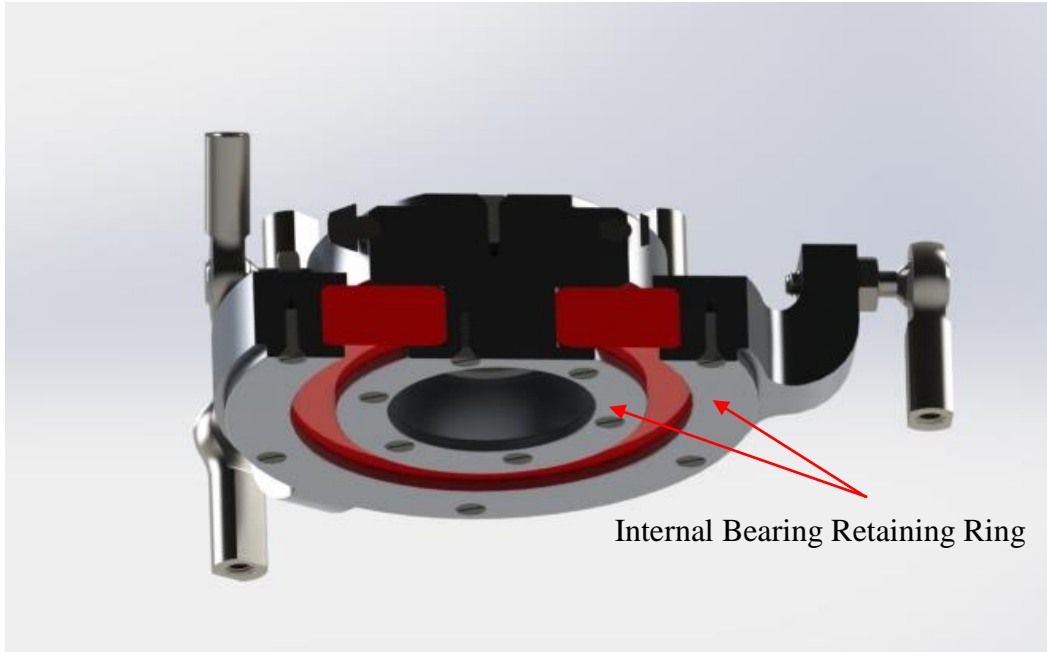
A Bottom view of the swashplate illustrating the two retaining rings.
